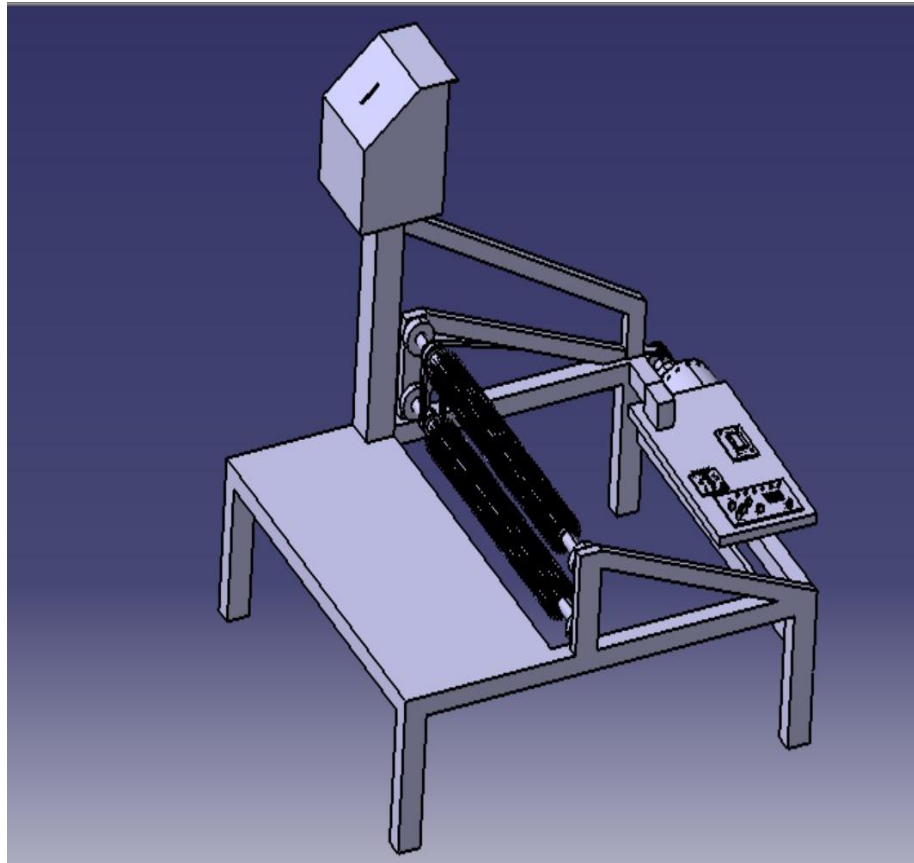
Design of Coin-operated Smart Shoe-polishing Machine
